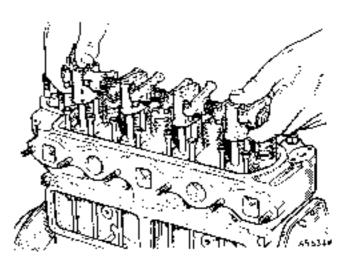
Withdrawing the rocker shaft assembly from the cylinder head
